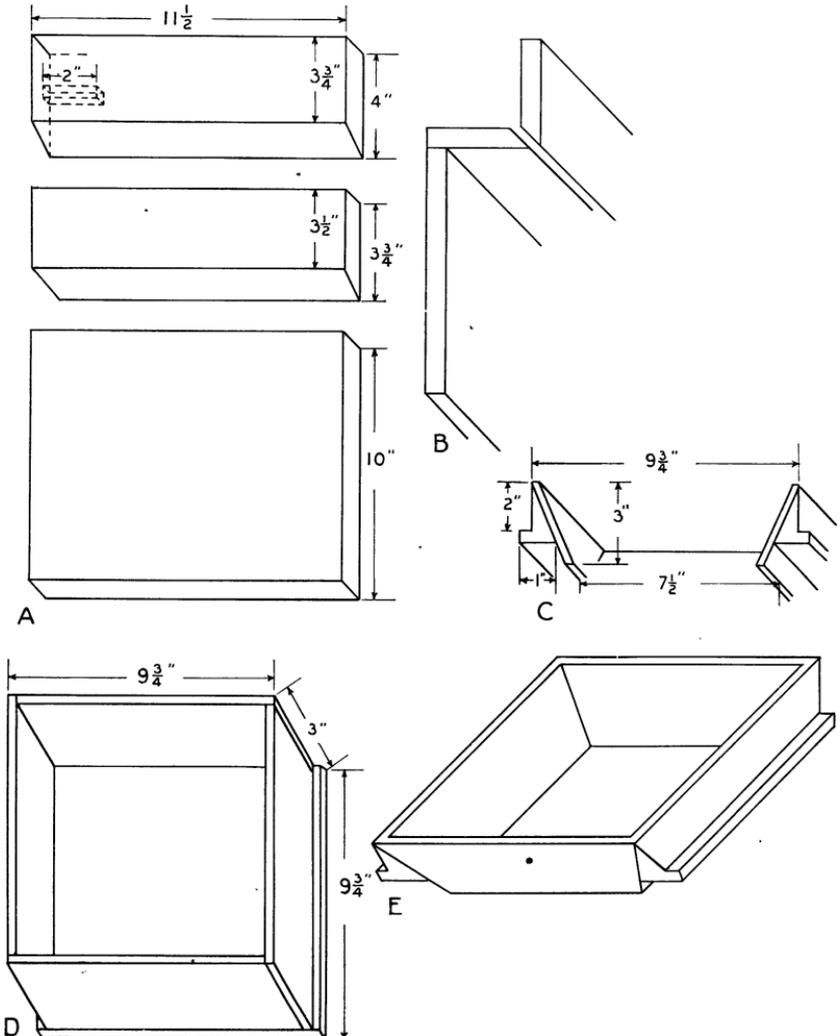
Detailed drawings showing the dimensions and construction of certain parts of the photographic light box: A, Right side; B, detail of right-side construction; C, cross section of the reflector; D, black-background box; E, reflector tray
